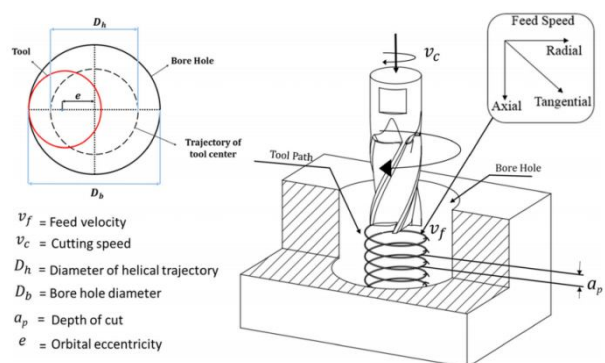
3-D schematic of tool motion in helical milling process [3]
